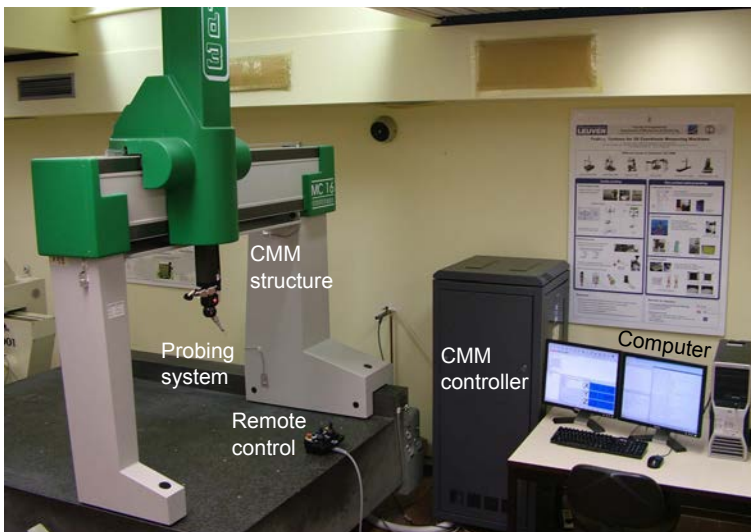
A conventional coordinate measuring machine (Coord3 MC 16 CMM at the Department of Mechanical Engineering of K.U.Leuven) and its components.
